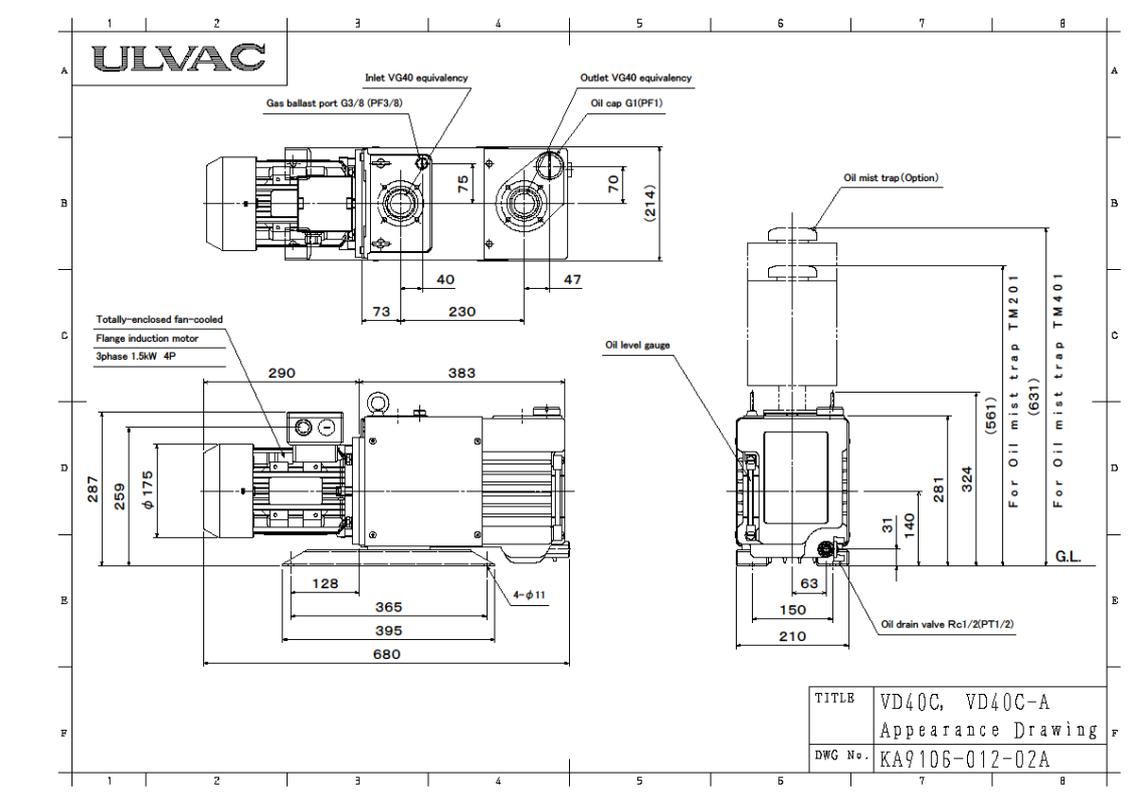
Dimensional drawing VD40C, VD40C-F, VD40C-N
